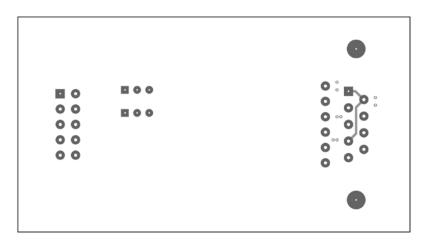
Low EMI Demo Board Layout (DC1747A), Inner Layer 2
